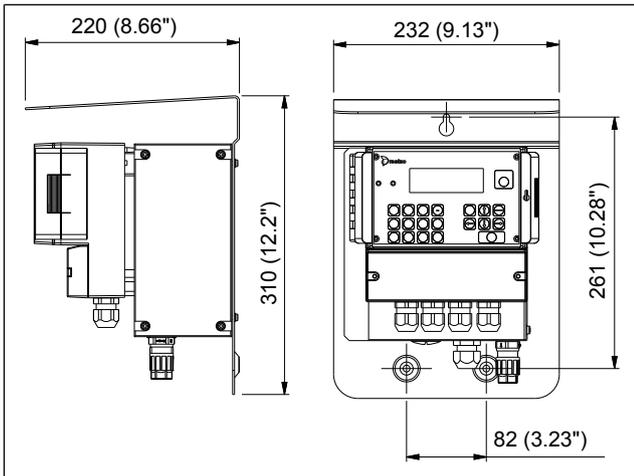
Mounting dimensions of TCU, MD model of the transmitter (K09176).
